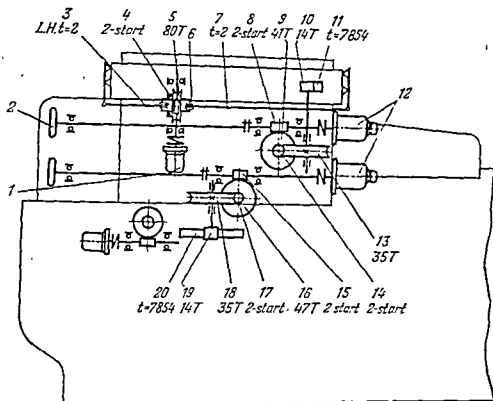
Gearing diagram of the table and saddle of the model 2A450 jig borer
